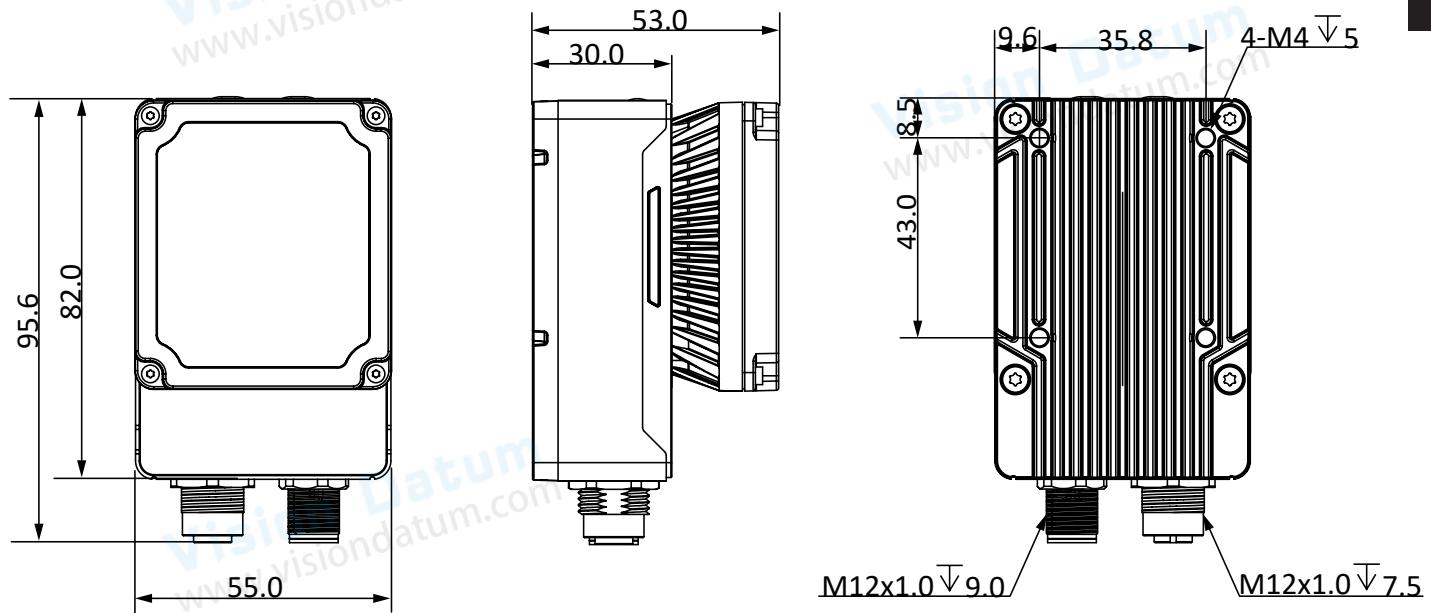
55.0 x 82 x 53 Mechanical Dimensions (in mm) of the Smart Cameras (The installation uses M4 screws).
